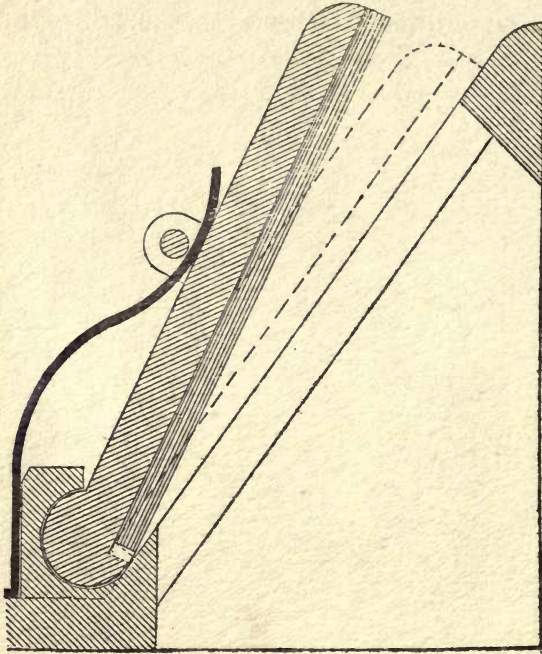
Details, Octagonal Escape Valve for 12-in. drive, or Ascension Valve for 18-in. drive. Section.
